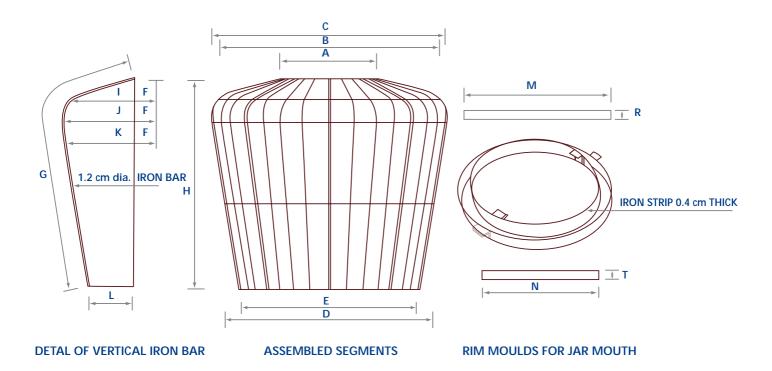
Drawing shows the dimensions of iron moulds for the jar body and rim moulds for the jar mouth. Detailed measurements for both moulds are given in Table 2-2.
